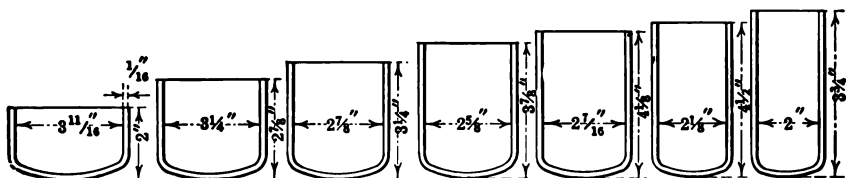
Seven operations on cold rolled steel shell drawn with cast iron punches and dies
